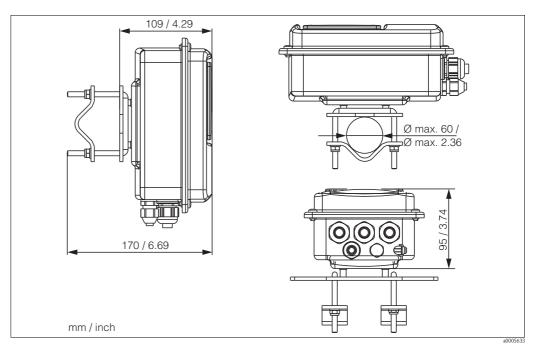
CLD134 mounting on pipes Ø 60 mm (2.36")
